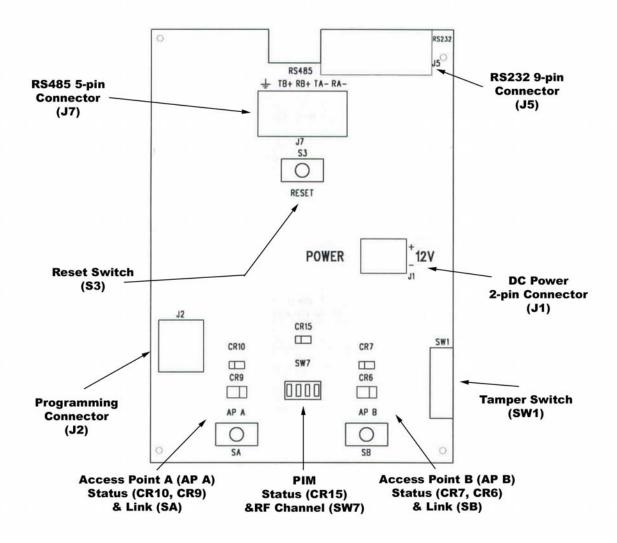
RS232 PIM & PIME Printed Circuit Board (PCB)
